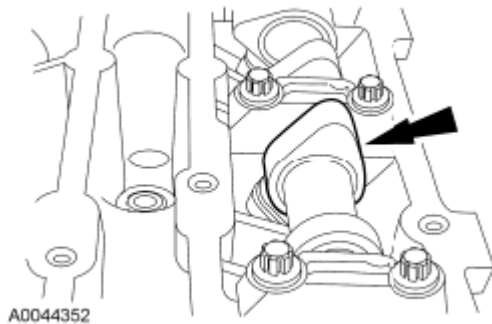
Locating Camshaft Lobe Position On No. 1 Cylinder
